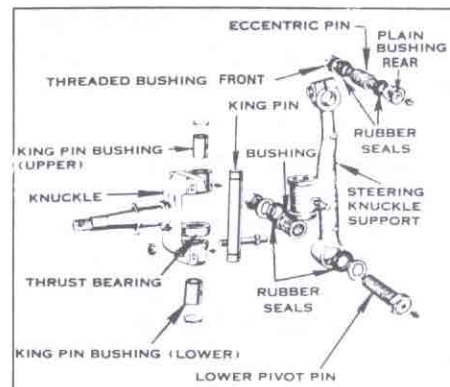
Upper and Lower Pin and Bushing, shown exploded with the king pin—
